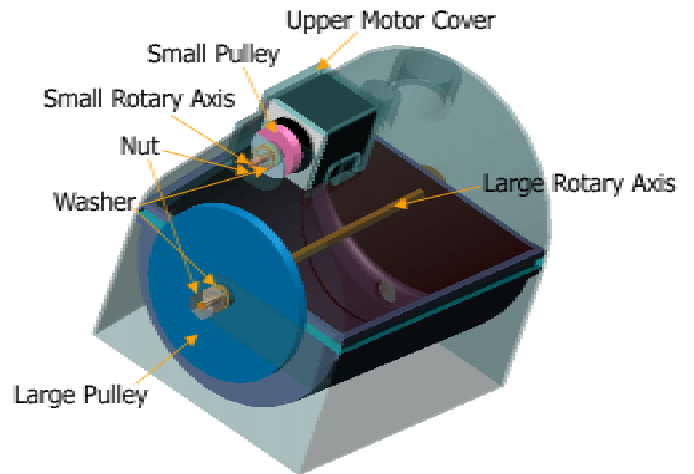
AN ANNOTATED ASSEMBLY MODEL TO SUPPORT ASSEMBLING
